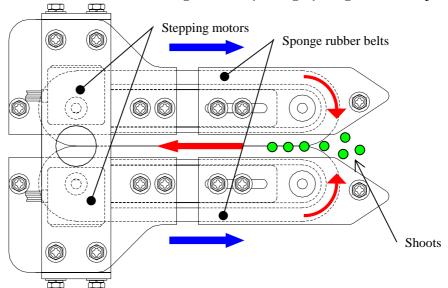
Assembly drawing of the CSPM (continuous shoot picking mechanism)
